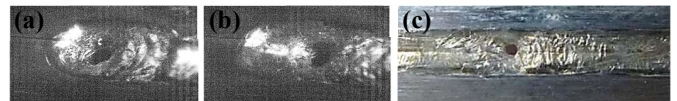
Keyhole Formation (a) and immediate collapse (b) at 140 J/cm (900 W, 4 m/min) and the resulting welding defect (c)
